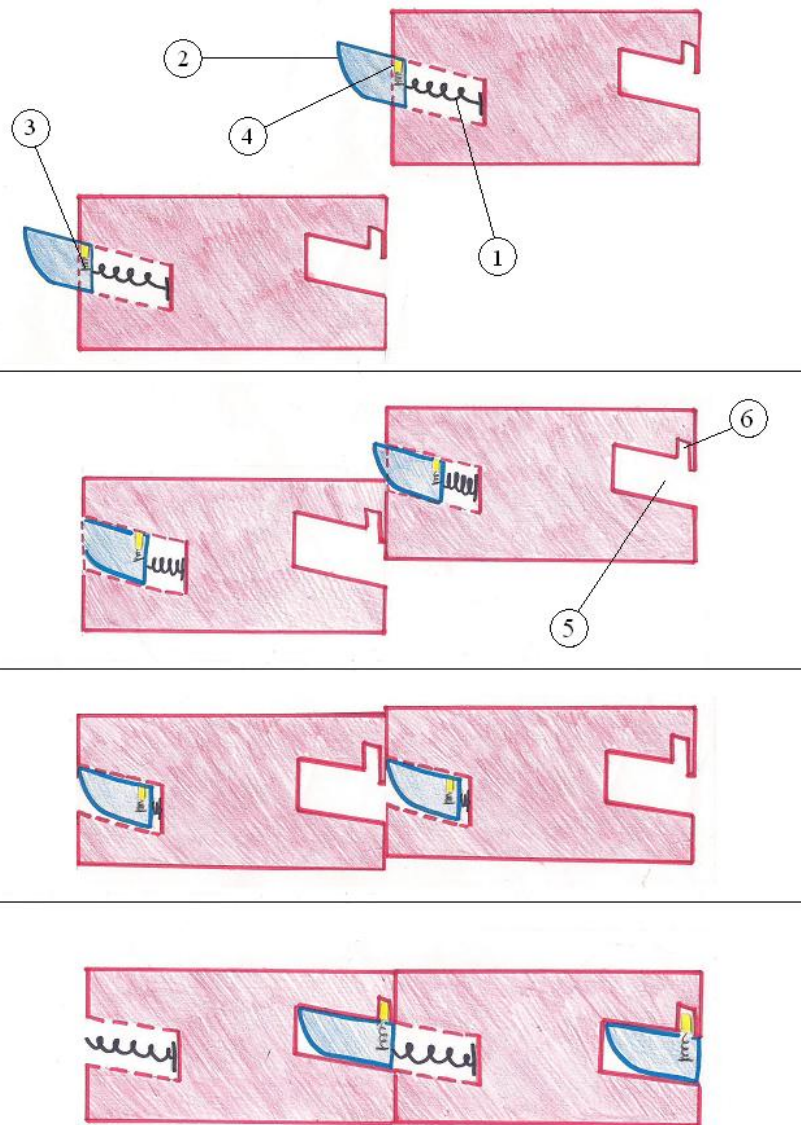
SHOWS A VISUAL REPRESENTATION OF THE STAGES DURING LATCHING FOR THE DOUBLE SPRING DESIGN
